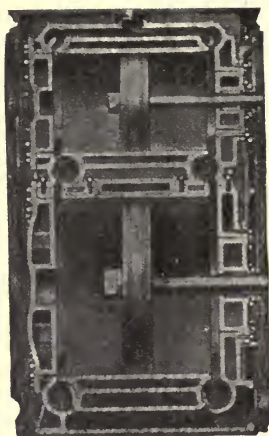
Section of Steam Jacket cast on the Cylinder.
